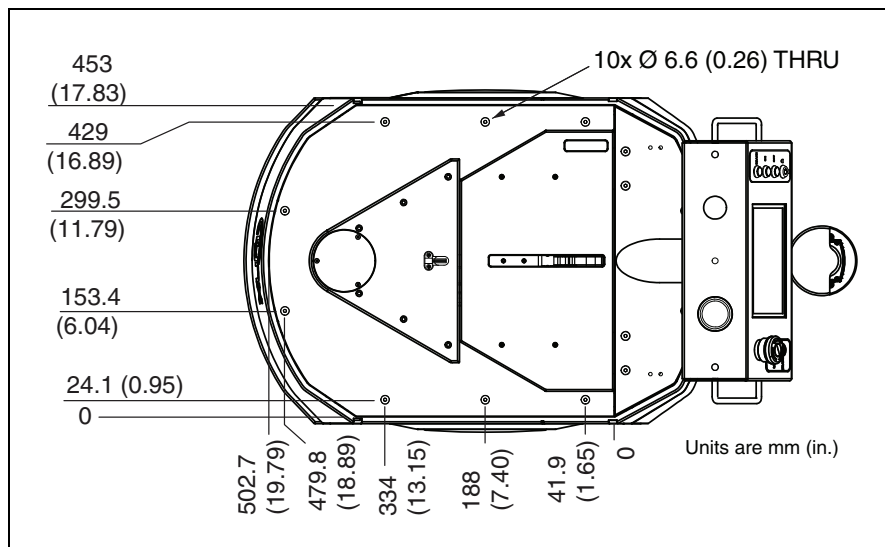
Coupling Plate Dimensions, Arms Removed
